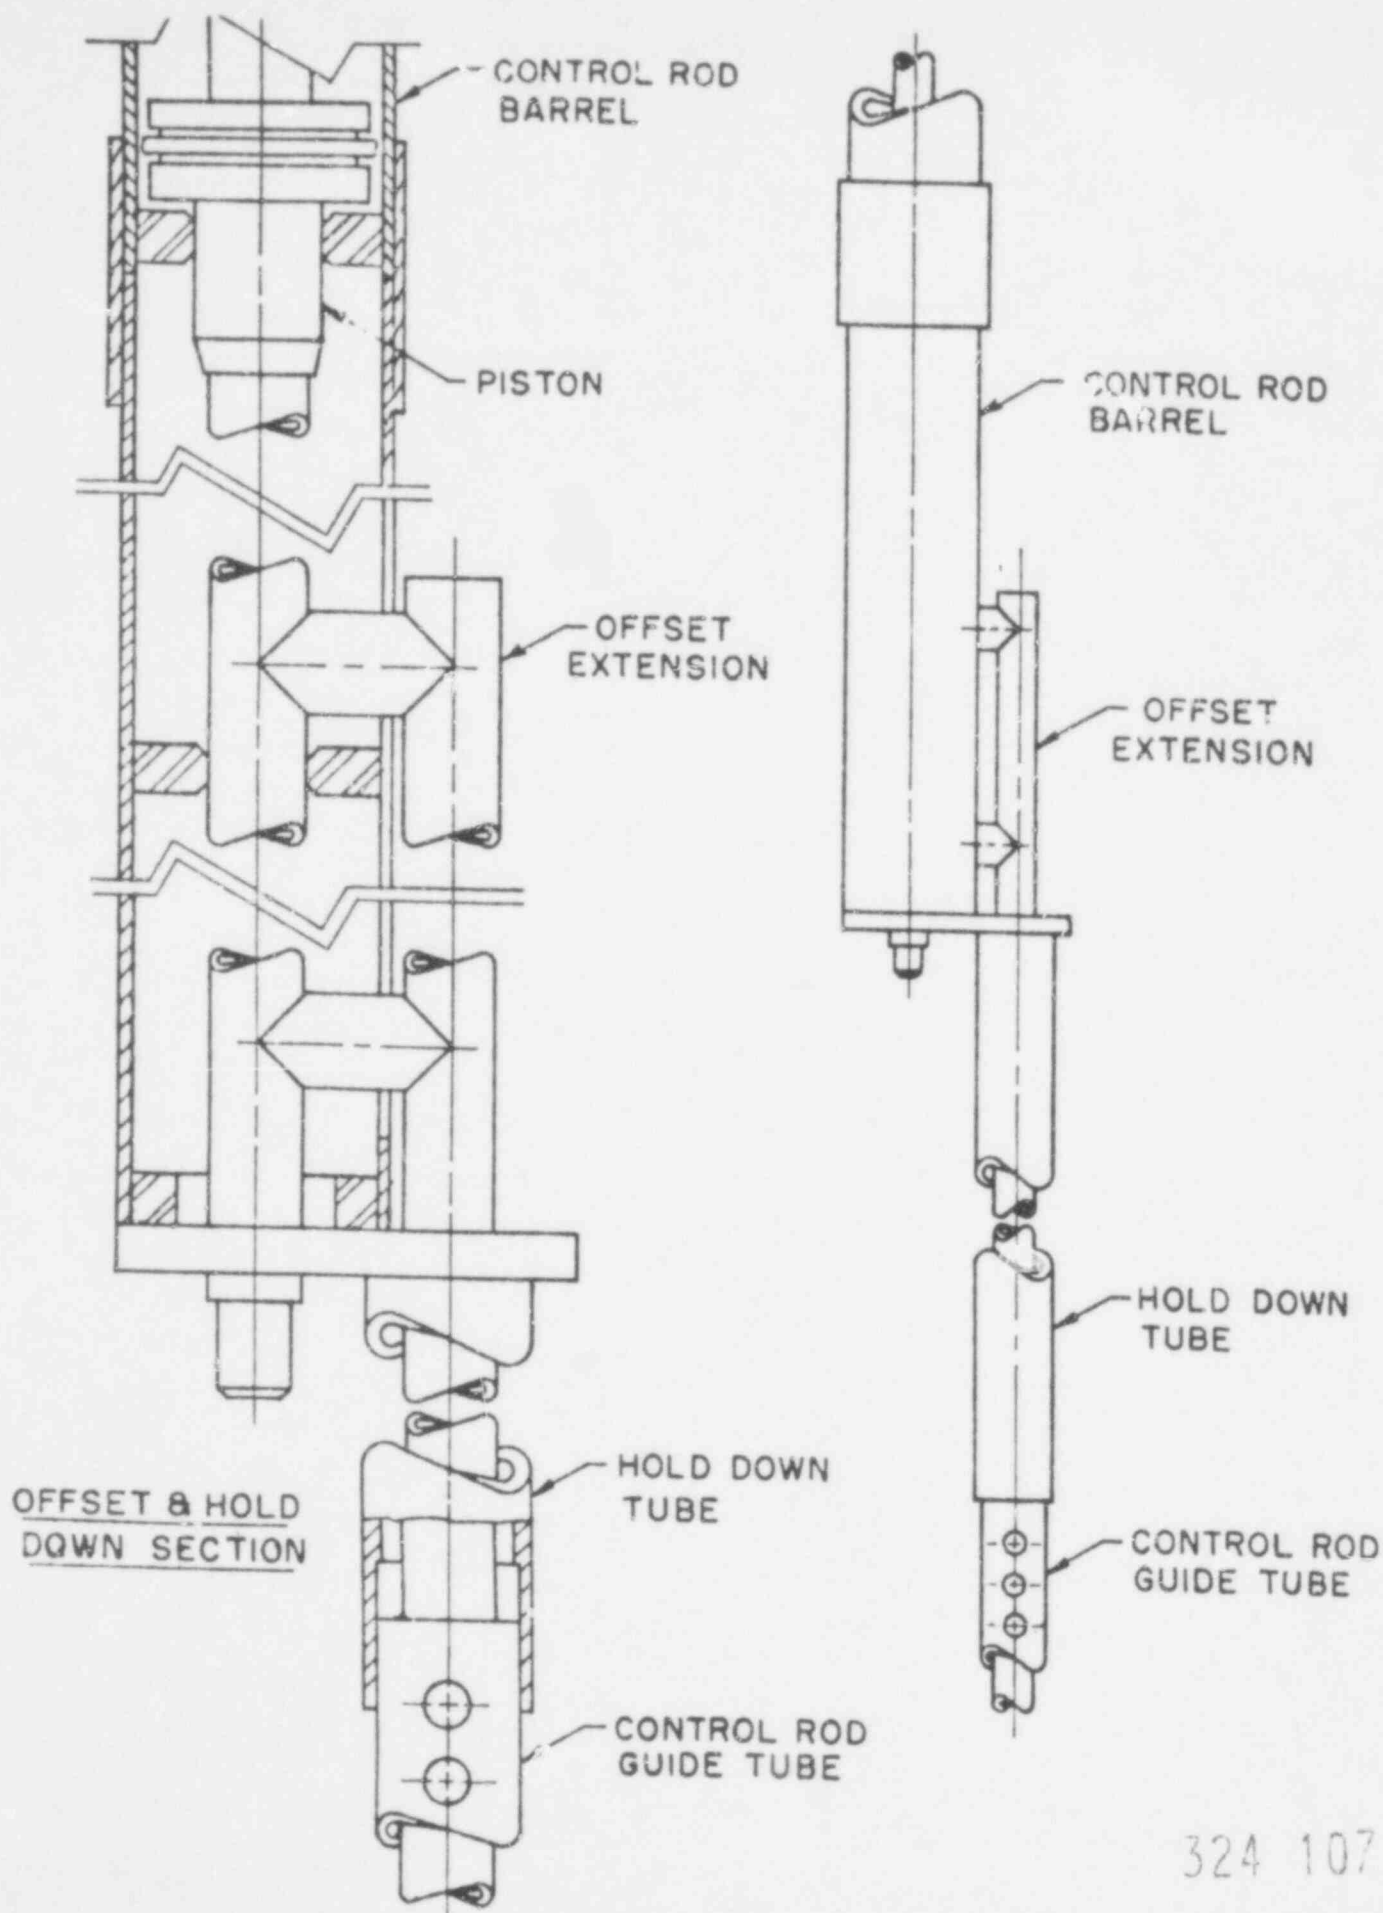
CONTROL ROD OFFSET AND HOLD DOWN ASSEMBLY
